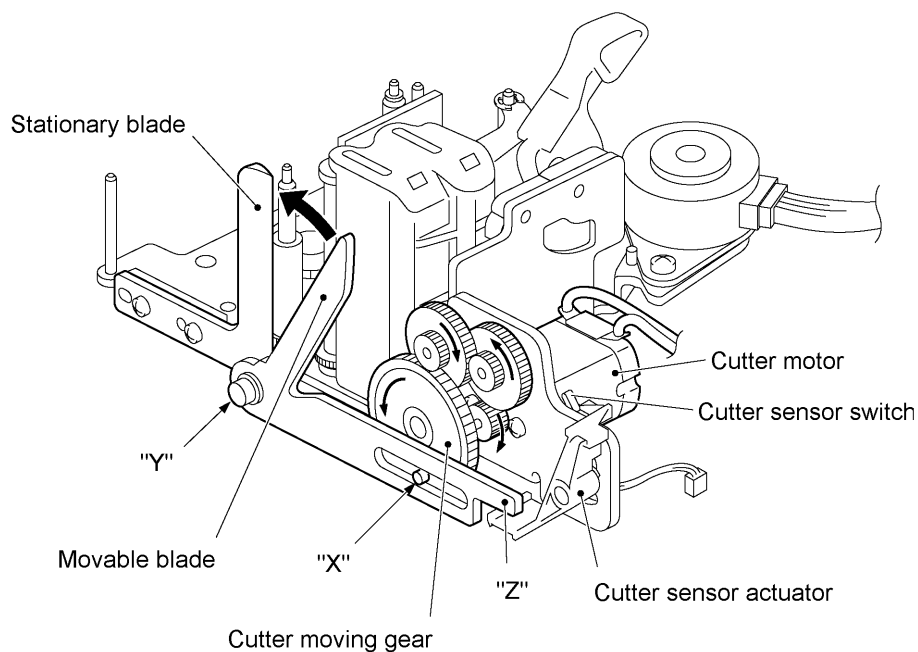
Automatic Tape Cutter Mechanism
